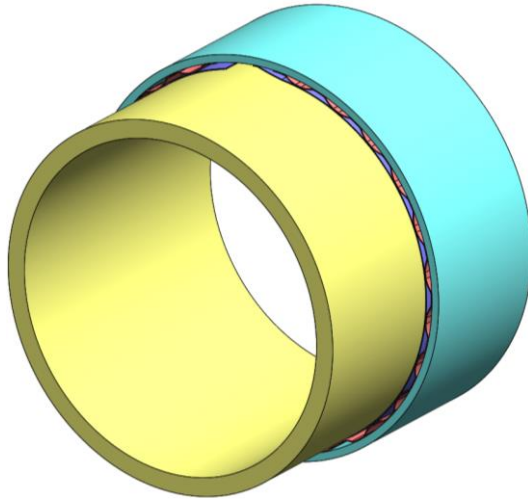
Foil bearing and shaft geometry from isometric view (Due to the axial symmetry front half of the system is displayed)
